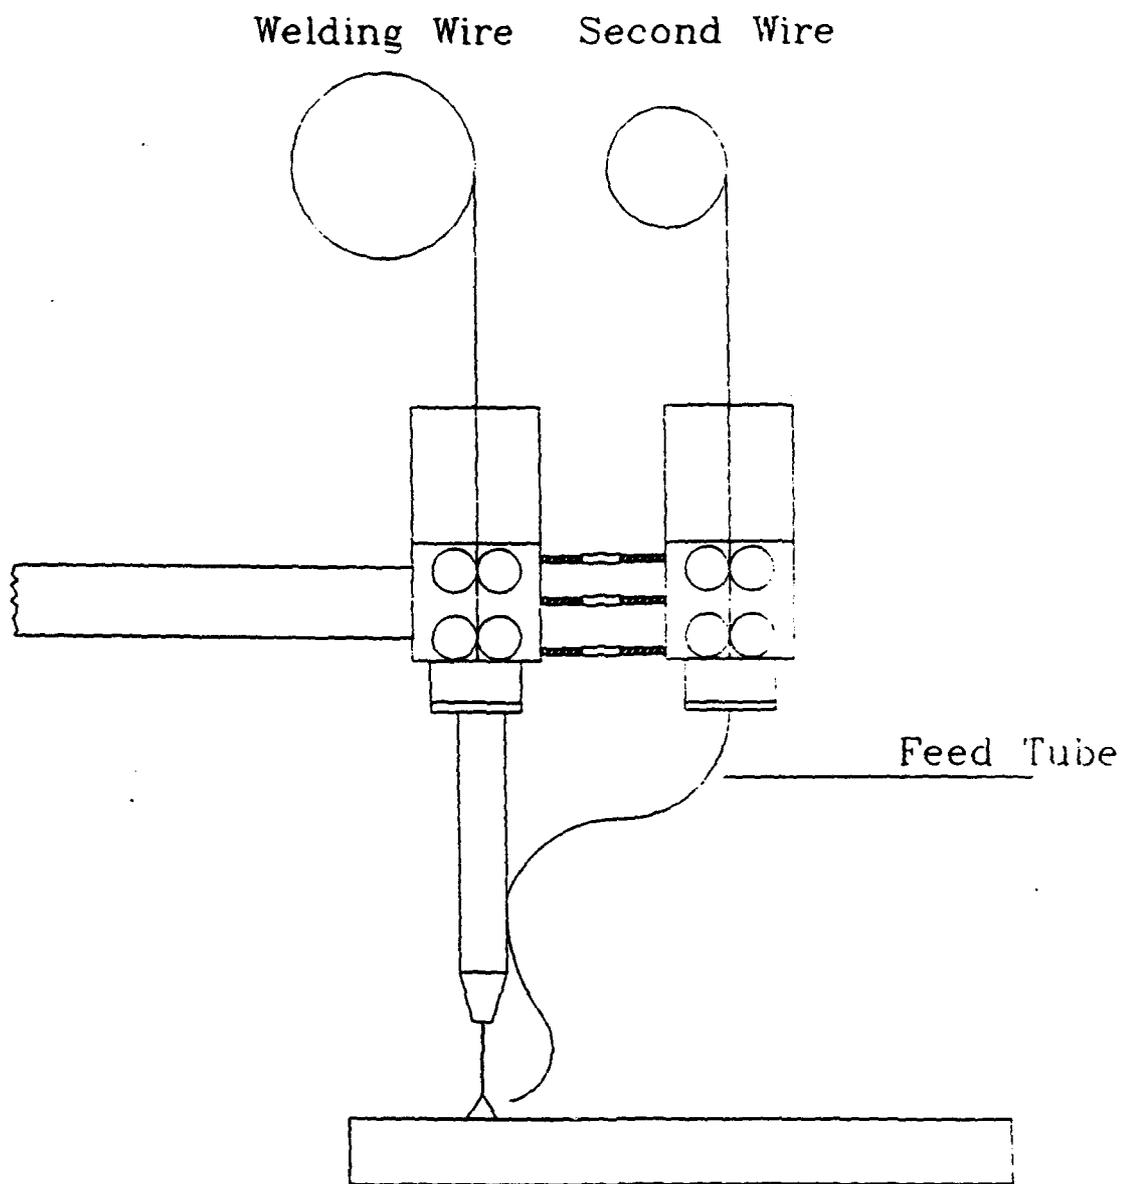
A dual (cold wire/hot wire) wire feeder developed for making systematic additions of microalloy elements to a submerged arc weld deposit.
